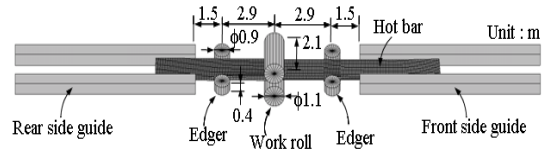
Shapes and dimensions of roughing train in hot strip rolling mill
